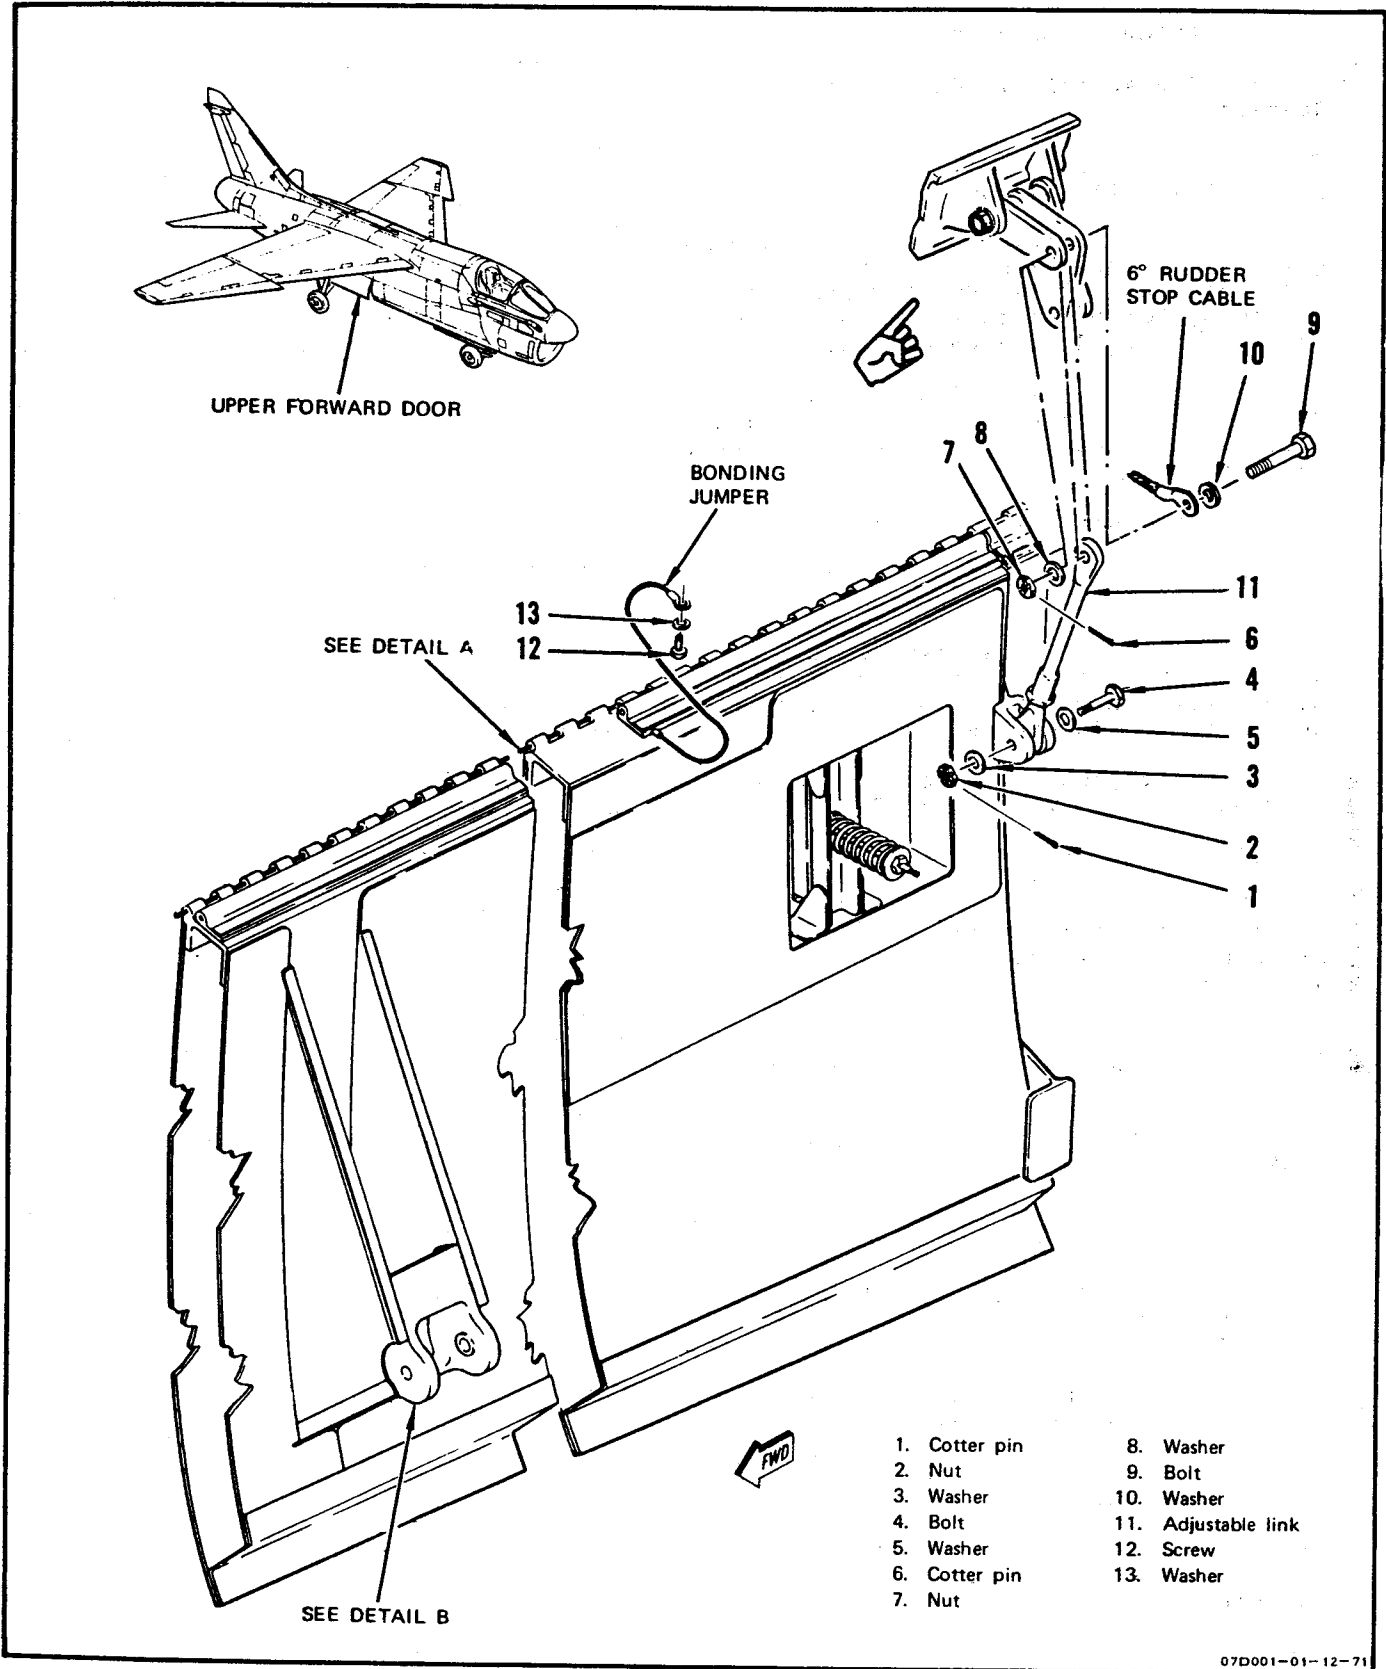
Main Gear Upper Forward Door Removal and Installation (Sheet 1)
